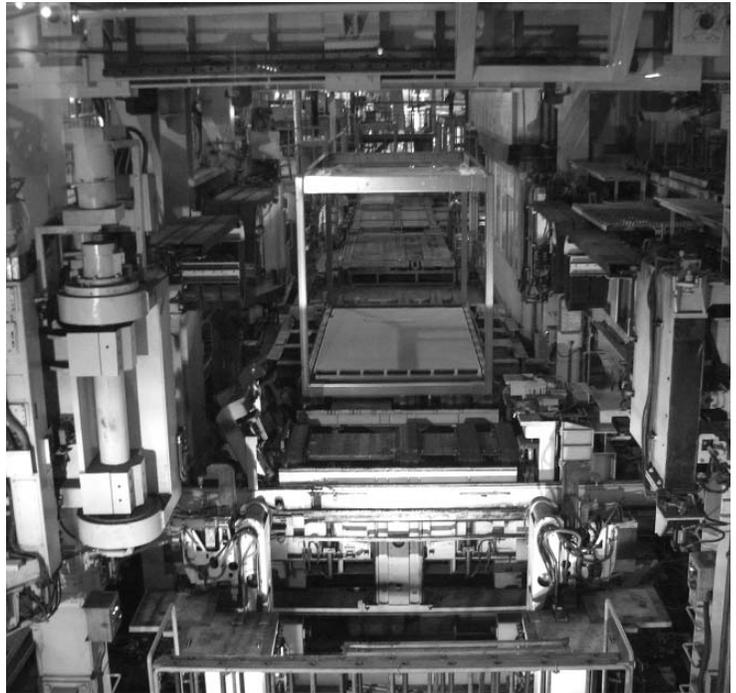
A welded module frame leaving the welding fixture. Panels are pre-attached to both floor and roof prior to welding.
